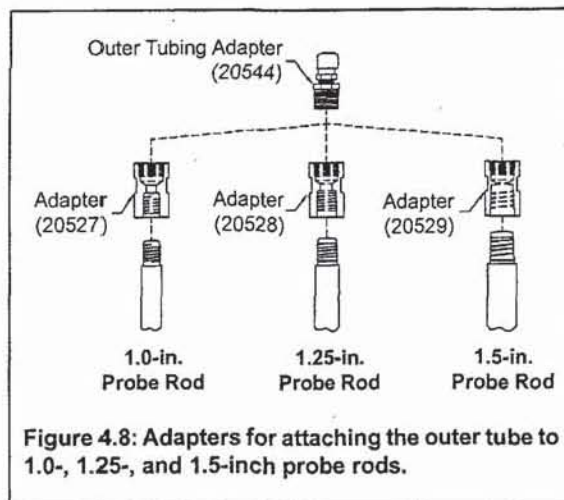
Adapters for attaching the outer tube to 1.0-, 1.25-, and 1.5-inch probe rods.
